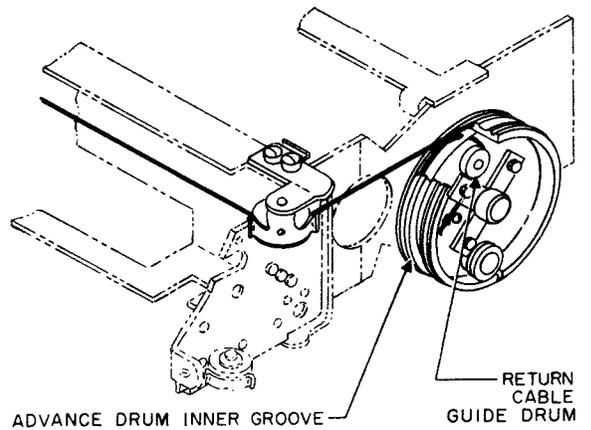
Return Cable Installation, Securing Cable to Advance Drum
